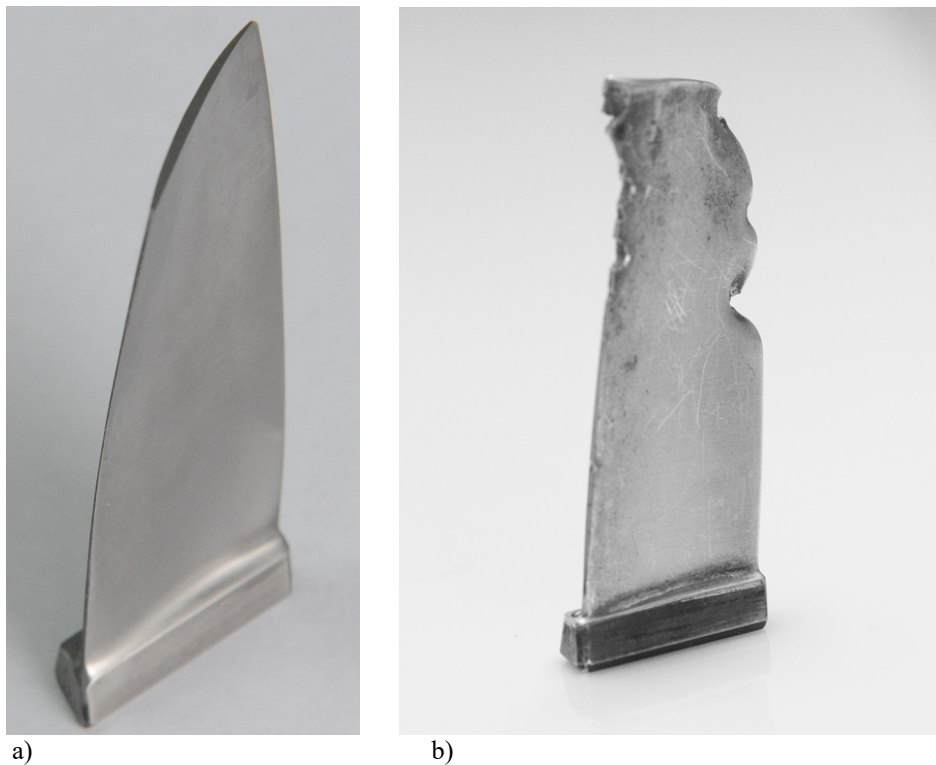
View of an undamaged blade (a) and blade after FOD (b)
